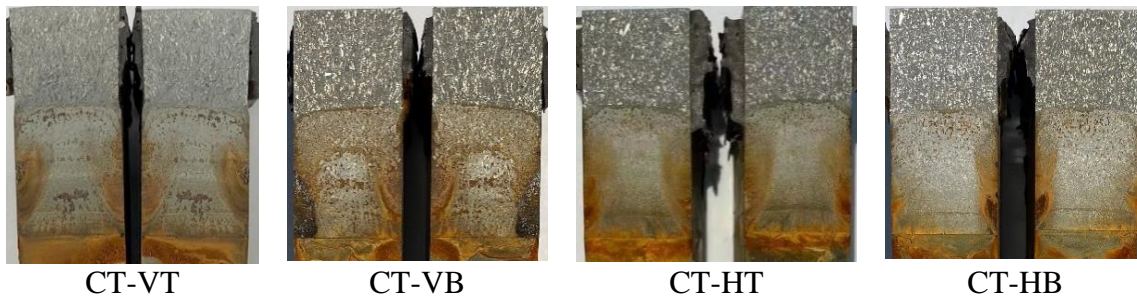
Fracture surface of WAAM built ER100S-1 specimens after CFCG test in seawater
